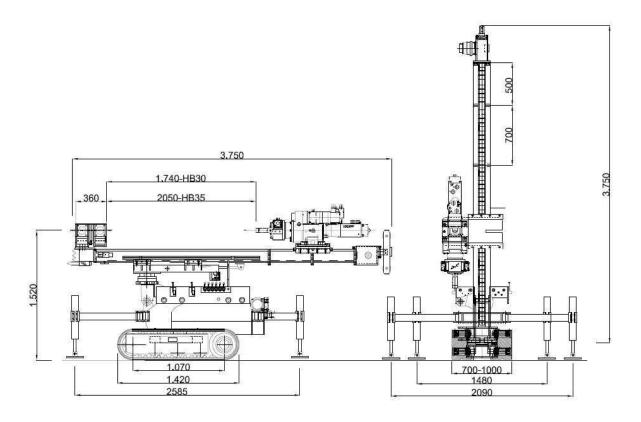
Top Hammer Drilling Rig Dimensions (in mm.)
